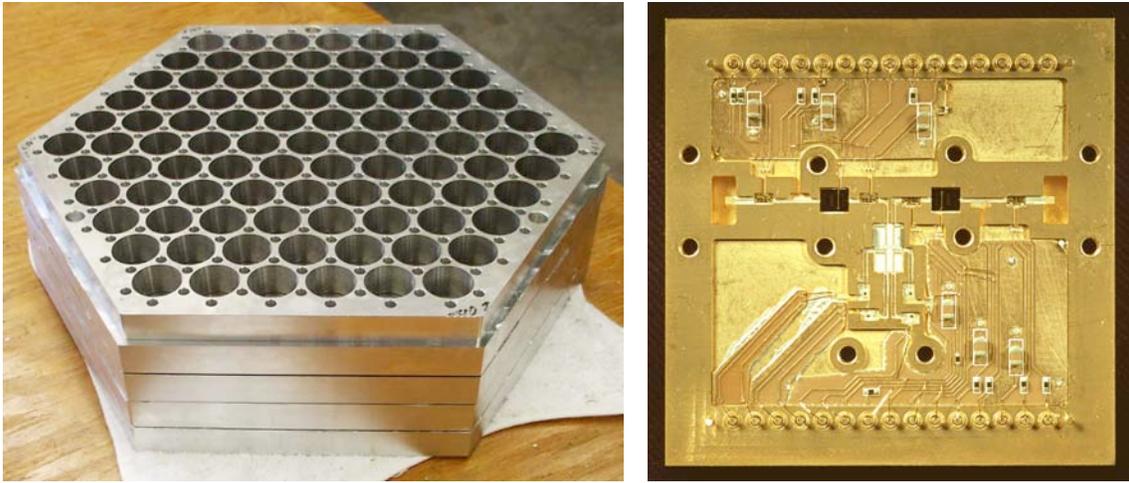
Left*—QUIET W-band 91-element feed array. This is a “platelet” array, in which an array of corrugated feed horns is built from many layers of aluminum with appropriately sized holes machined in them, all vacuum welded together. [Josh Gunderson, Miami] *Right*—QUIET Q-band module. Larger than the W-band module in Figure 13 because the array spacing for this wavelength is greater, the Q-band module combines some of the discrete components of the W-band module onto miniature circuit boards, making automated assembly even easier.
